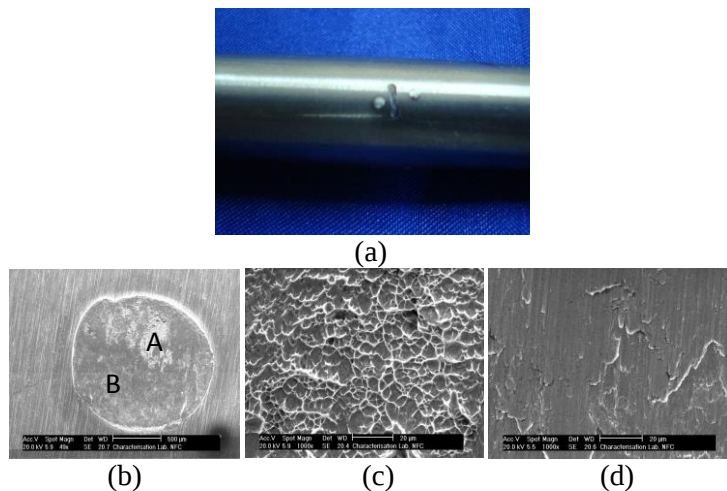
(a) Fractured surface of spacer pad weld; (b) Fractured projection at 50x magnification; (c) Location A in fig b at 1000x; (d) Location B in fig b at 1000x magnification
